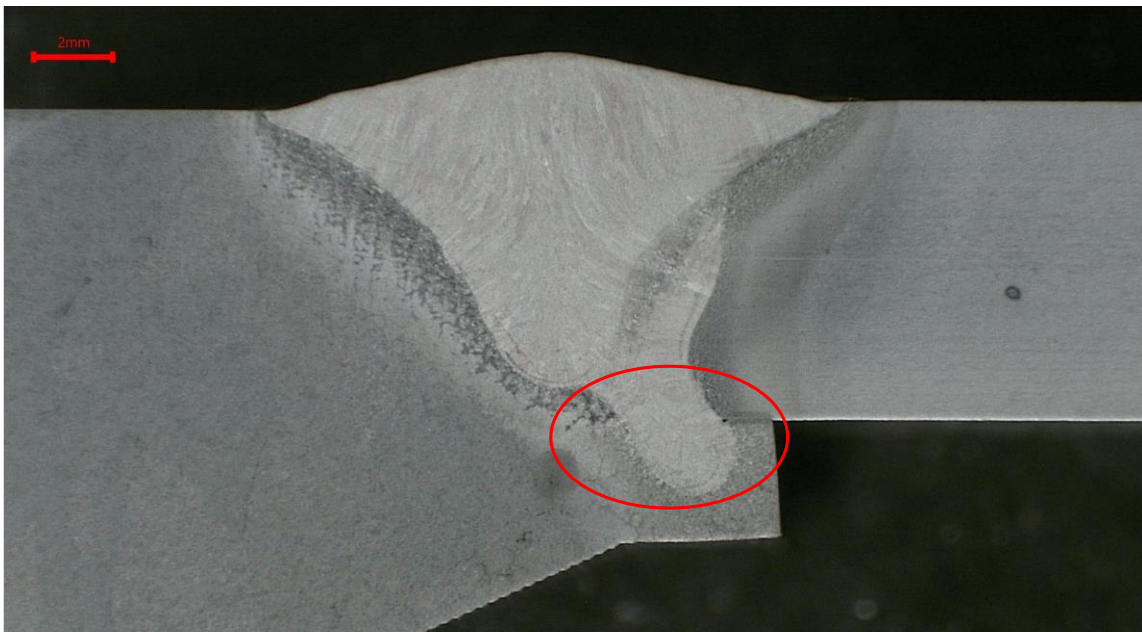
The weld between S700 and G26CrMo4 steels with adjusted welding parameters and torch positioning. These changes resulted a good penetration for the root pass with a desired short unwelded section which worked as the initial crack.
